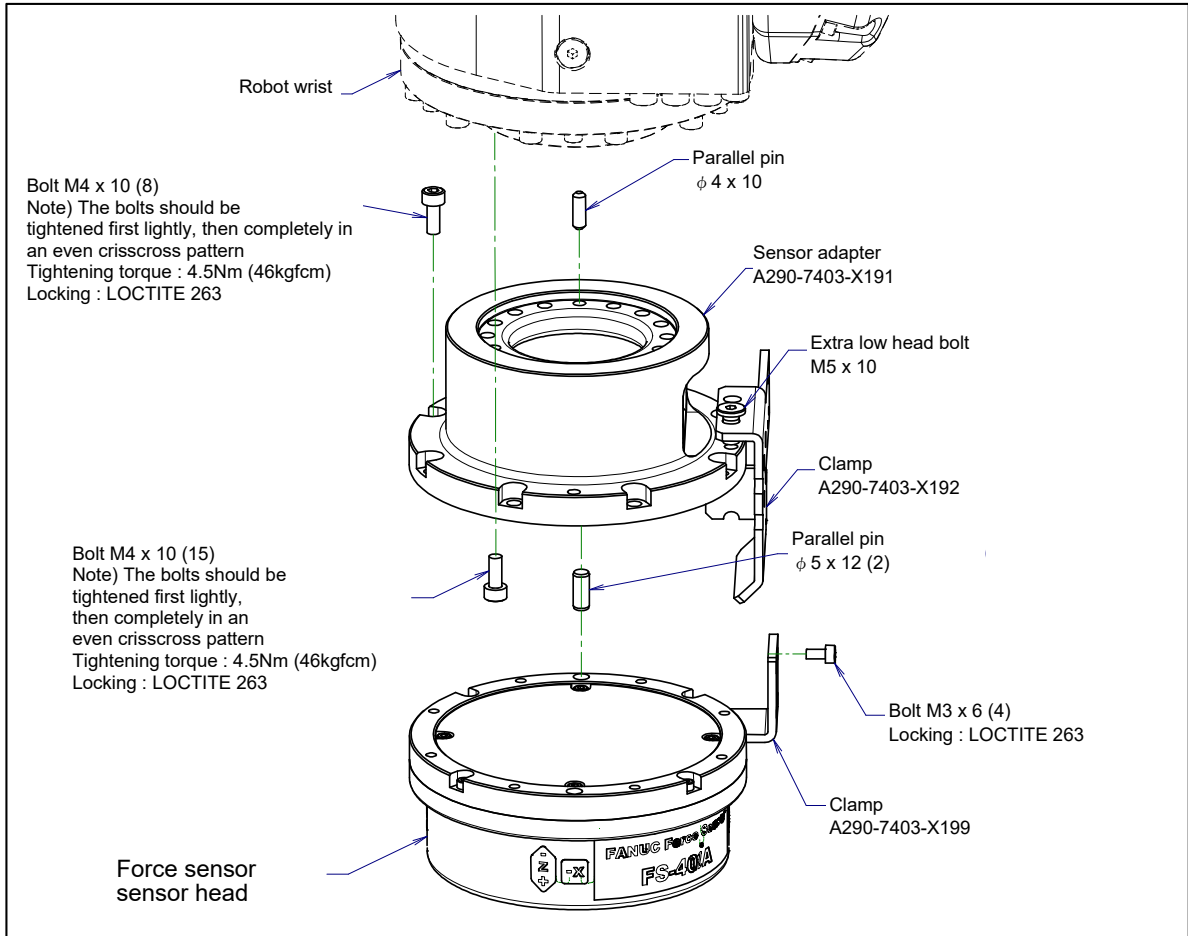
(c) Replacing the force sensor, sensor head and adapter (FS-40iA)
